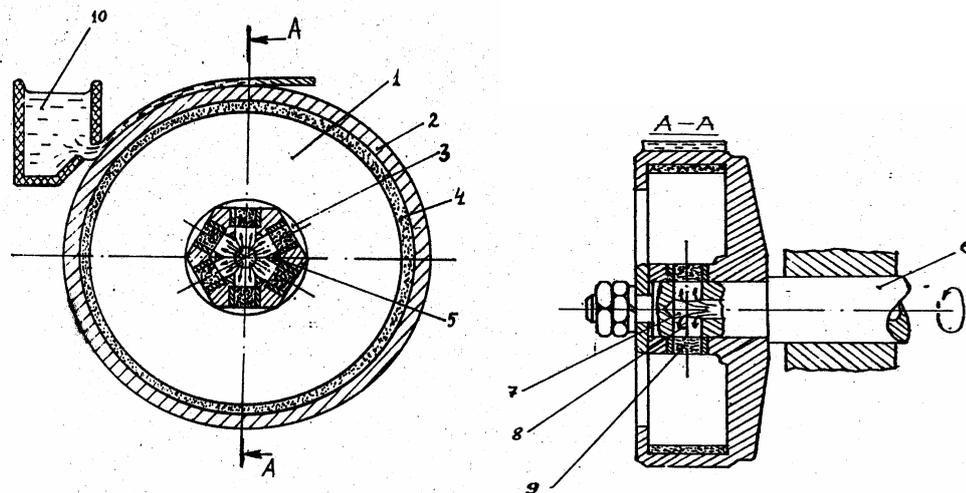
1 – casting machine, 2 – rim, 3 – hub, 4 – porous layer, 5 – pin, 6 – axis, 7 – internal hole, 8 – radial holes, 9 – porous body, 10 – tundish.
